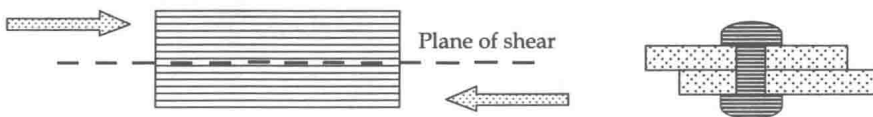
Shear action in which parts of same body slide in different directions. Shearing takes place along the middle plane shown by dotted line. A rivet is subjected to shearing in a riveted joint.
